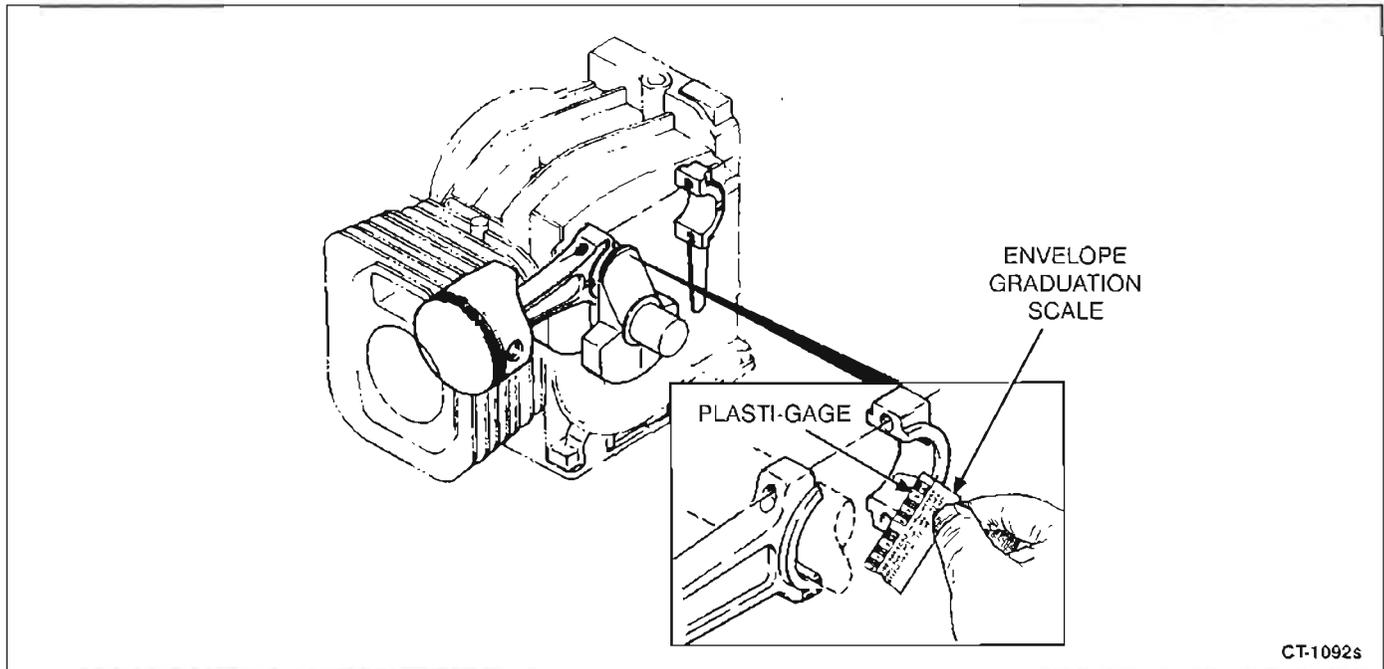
MEASURING CRANKPIN CLEARANCE
